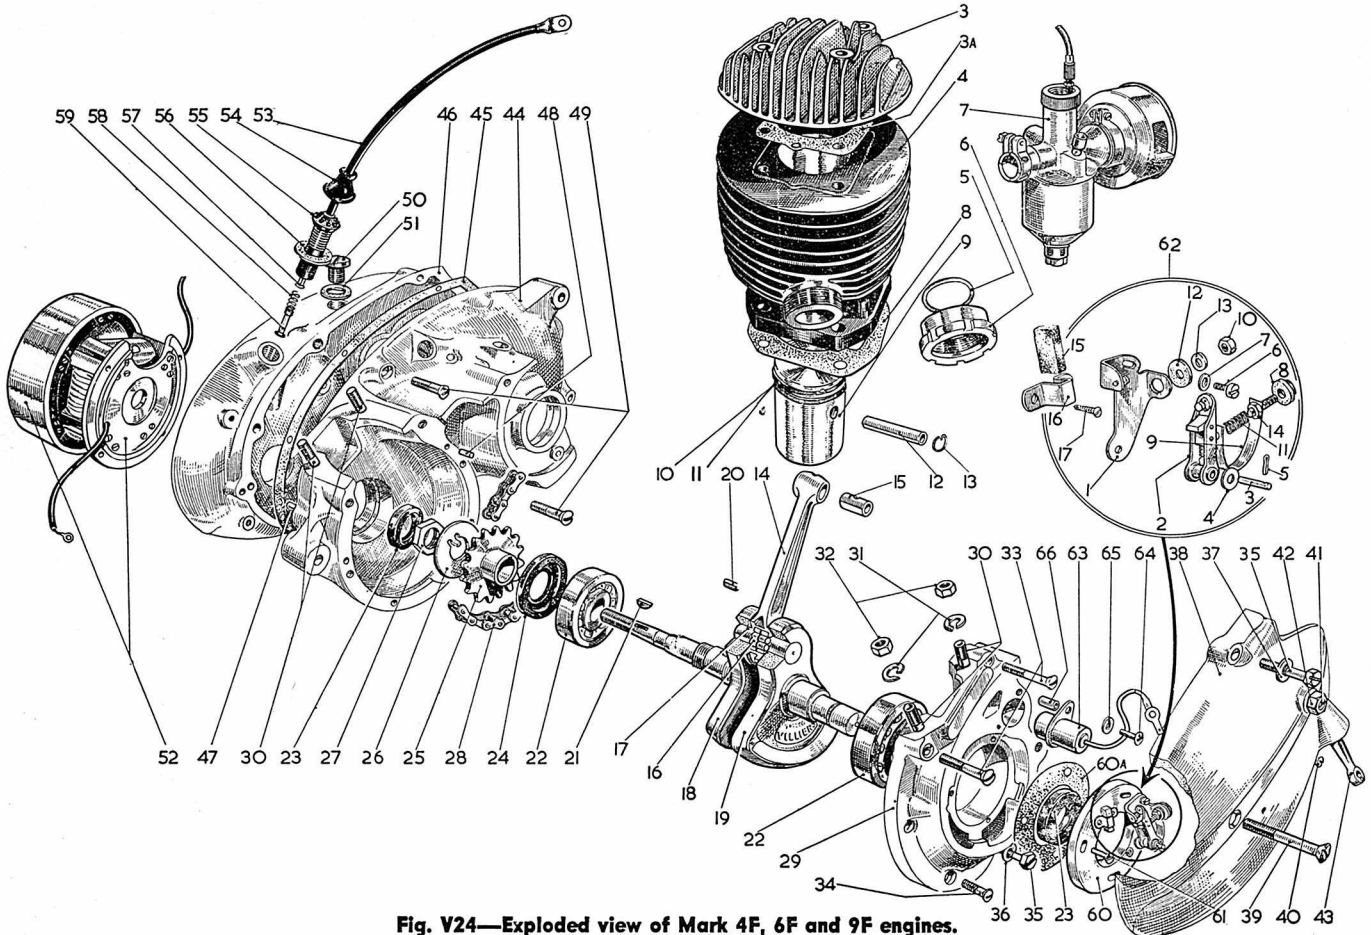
Exploded view of Mark 4F, 6F and 9F engines.
